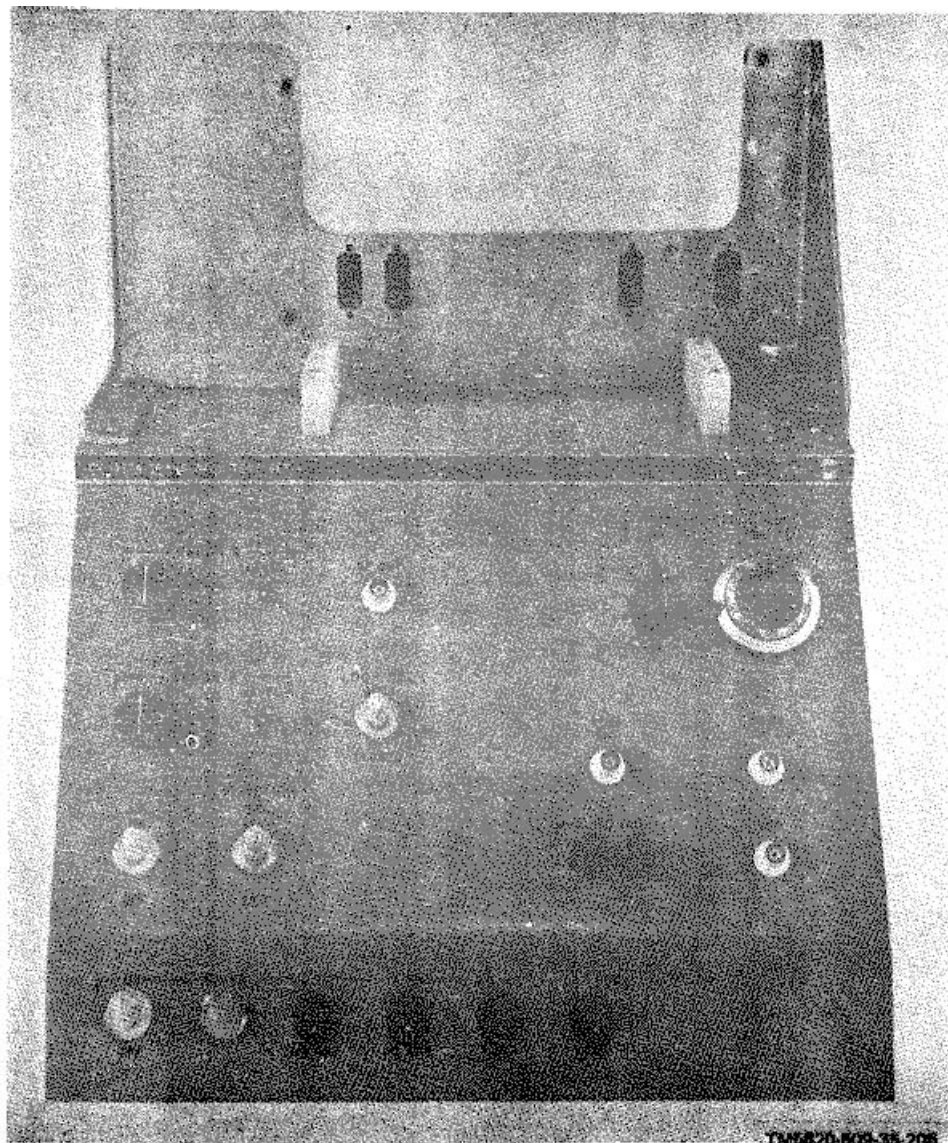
Test Fixture for CV-1377A/PRC-47, Suggested Layout.
